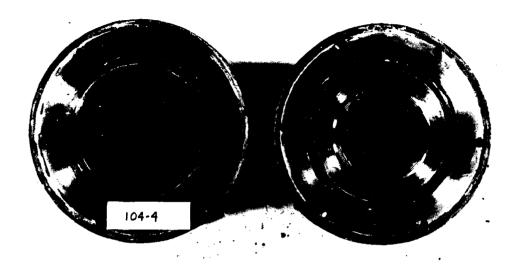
Carbon steel flat flange test jig with corrosion resistant metal overlay without anode after exposure showing lack of corrosion on overlay.
